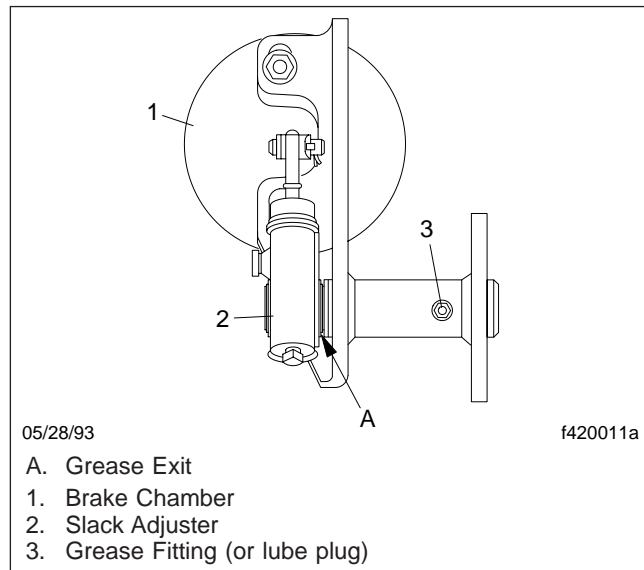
, Camshaft-and-Chamber Bracket Lubrication
